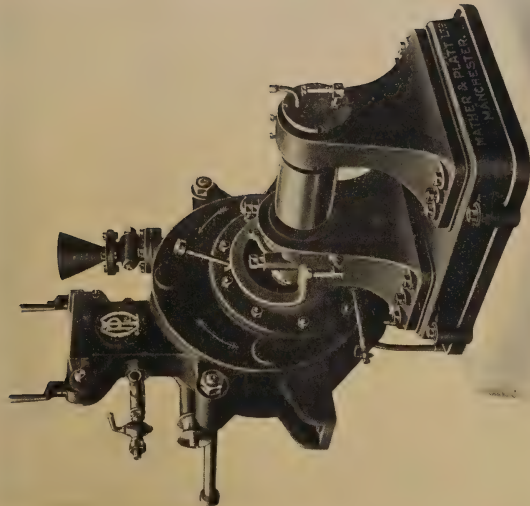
PLAUSON COLLOID MILL (BACK VIEW).
